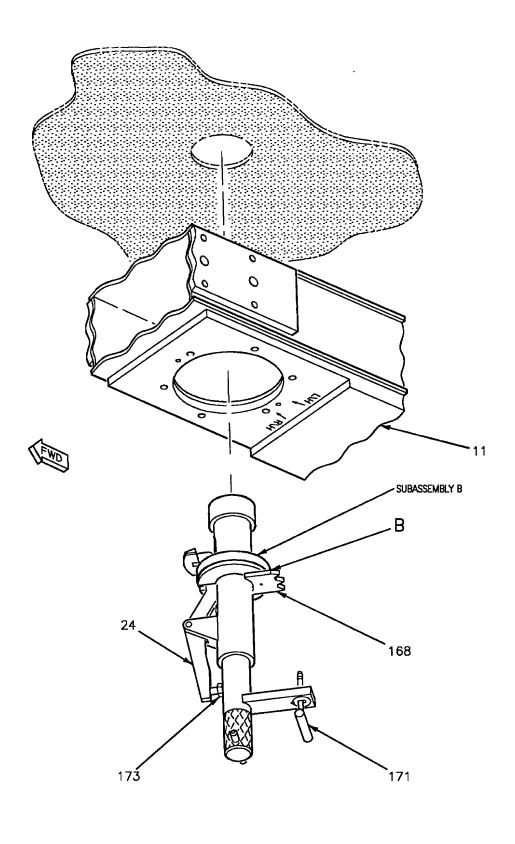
Inspection of Pylon Post Bushings (Sheet 1)
